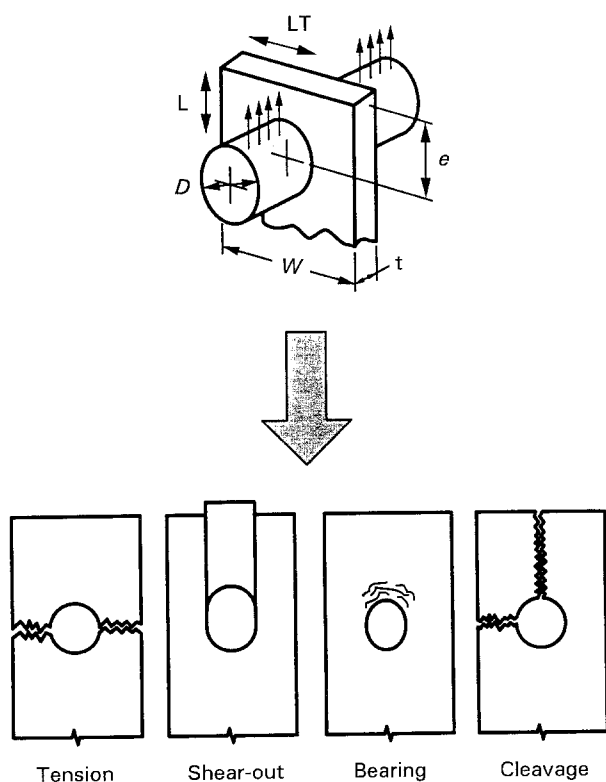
Typical failure modes of bearing test for ARALL laminates.
